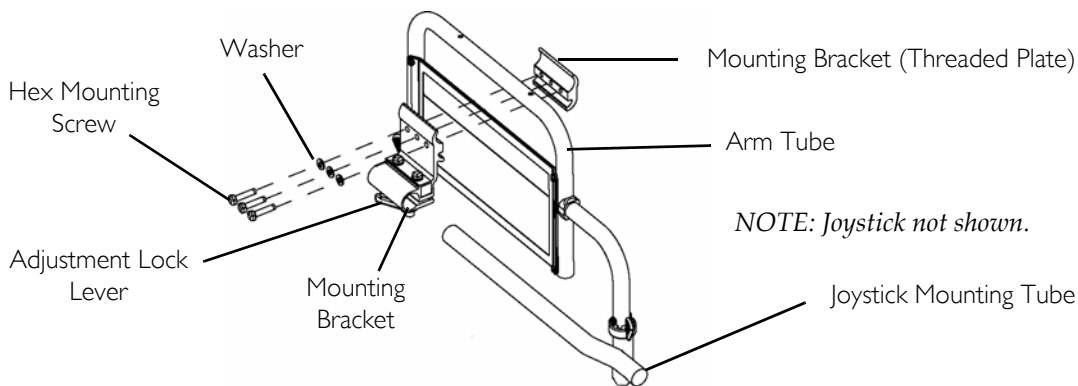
Removing/Installing/Repositioning MK6i Joystick
